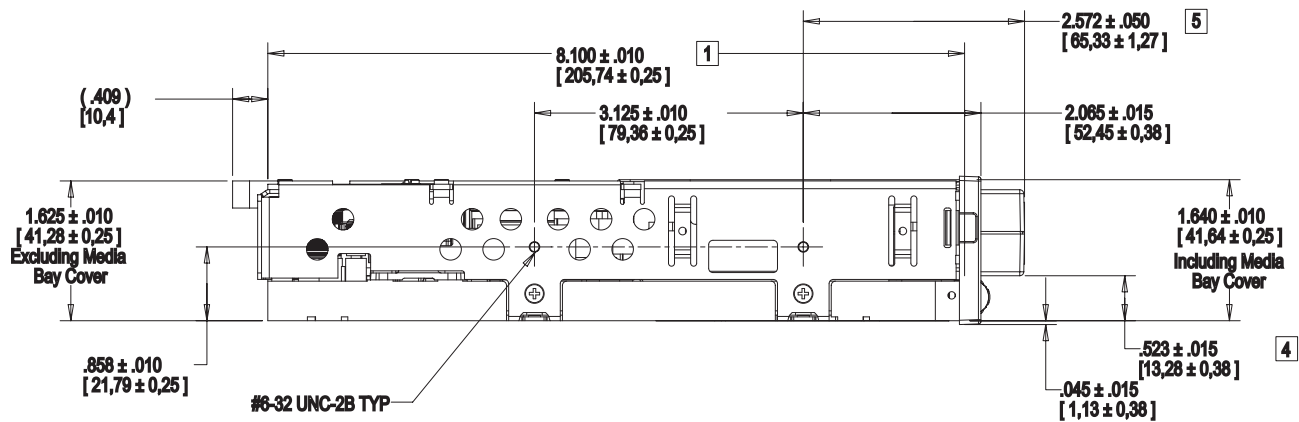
Mounting Holes and Dimensions (Bottom View)
